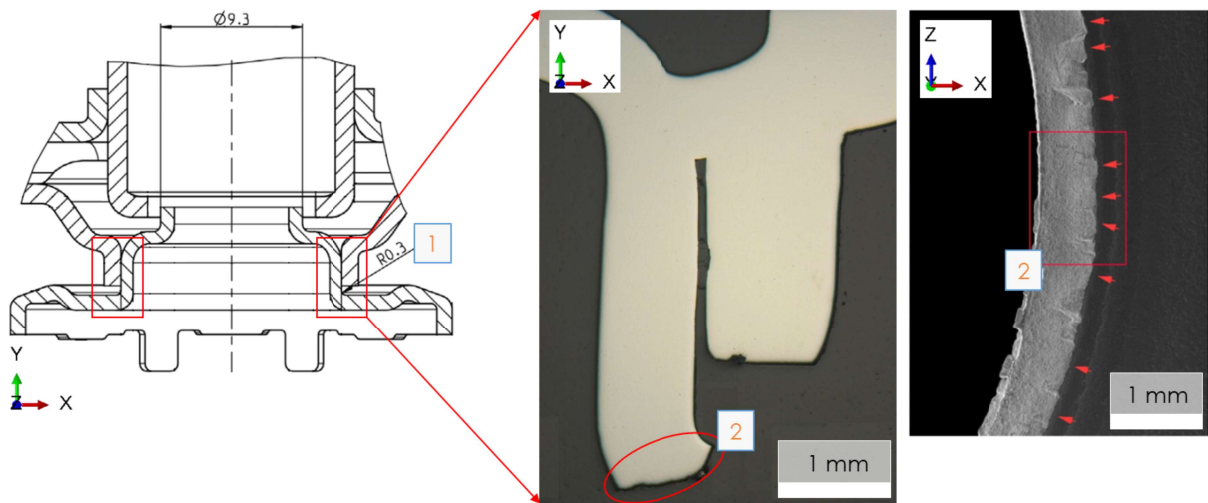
Left – Detail of the dosing module flange cut from the technical drawing, with the marked critical site (1); Right – Metallographic cut of the flange in the fracture region (2) [170].
